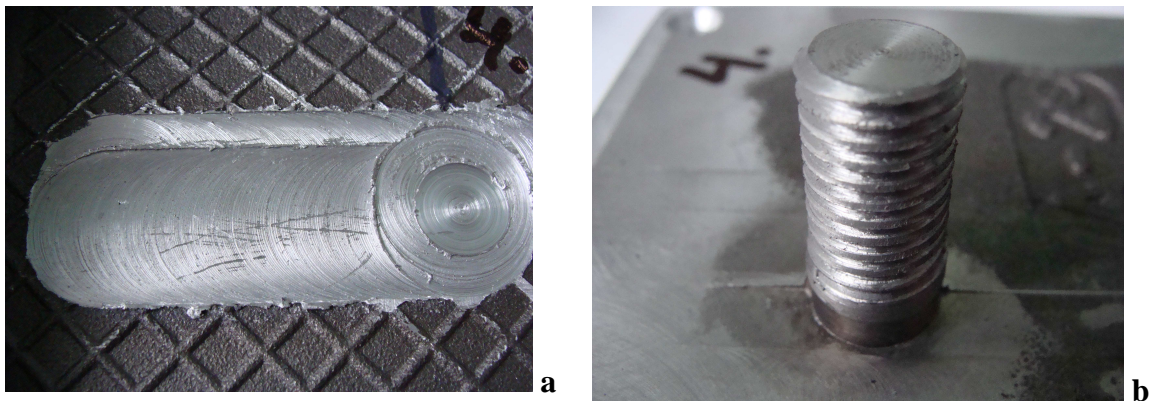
The view of the joints after FSW process: a – form the face side of the weld, b – from the root side of the weld, sample no. 4 [10]
